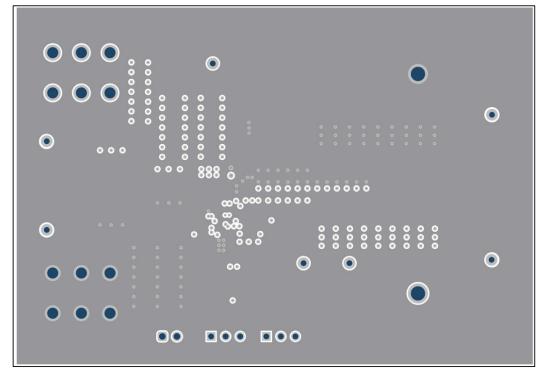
TPS61287EVM-042 Inner Layer1 Layout
